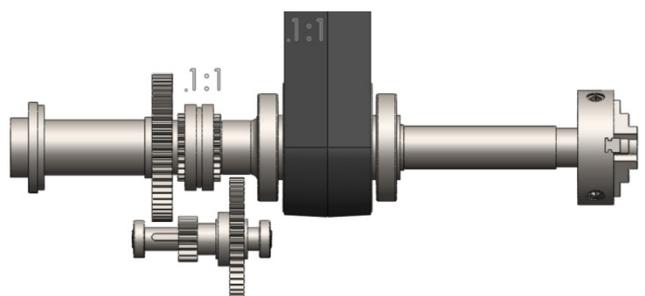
Models for the spindle gear to achieve a gear ratio 1:1
